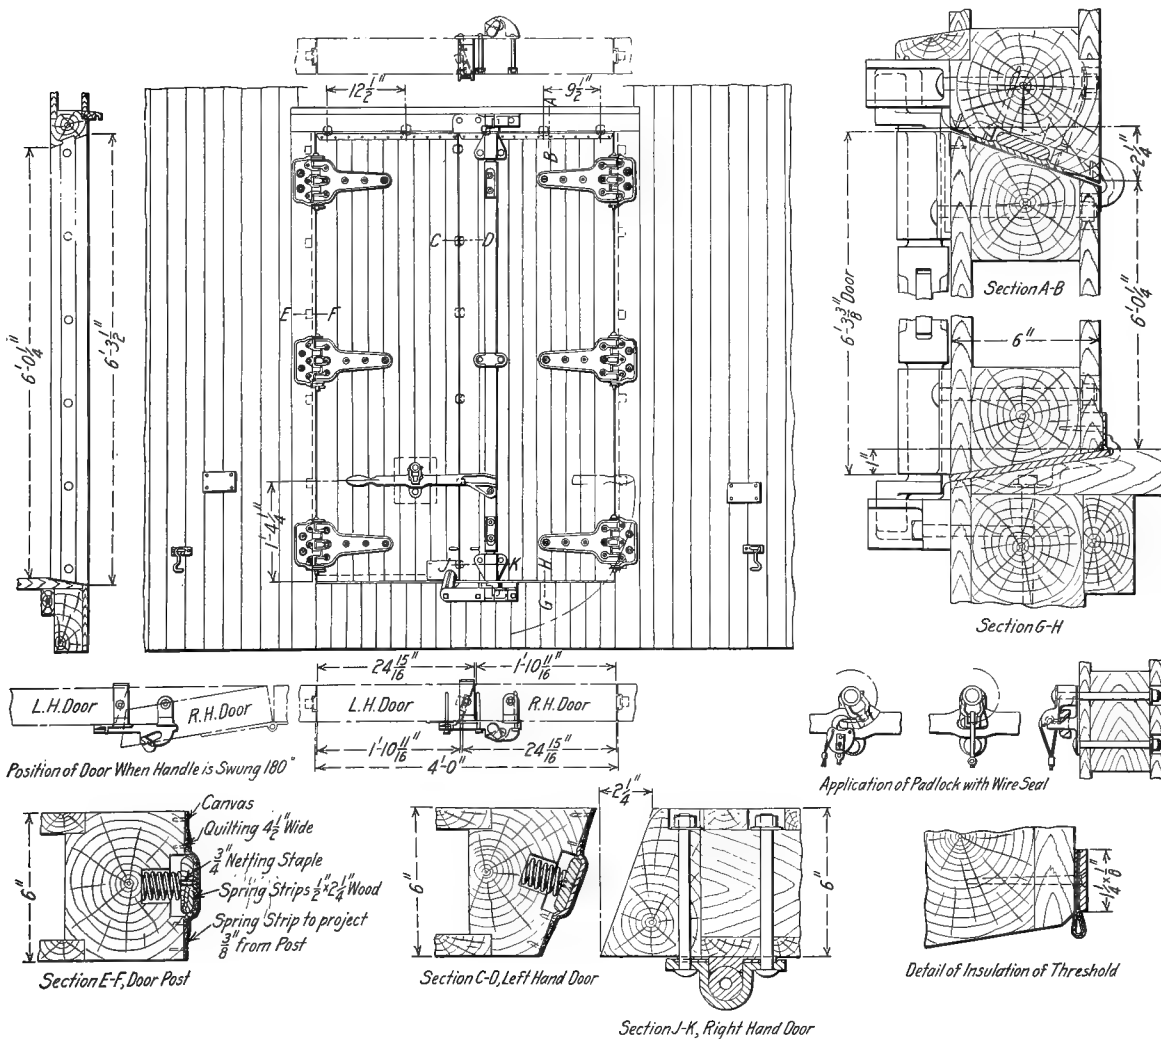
Miner Refrigerator Car Door Fastener and La Flare Insulation. W. H. Miner.
